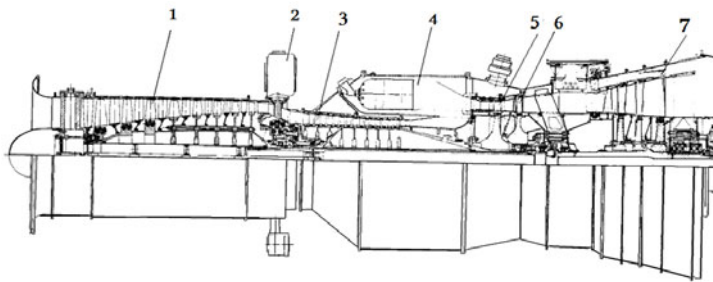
Longitudinal section of rotor system gas turbine engine DR76 type, where: 1 – low pressure compressor (LPC), 2 – auxiliary drives, 3 – high pressure compressor (HPC), 4 – burning chambers, 5 –high pressure turbine (HPT), 6 – low pressure turbine (LPT), 7 – power turbine (PT)
